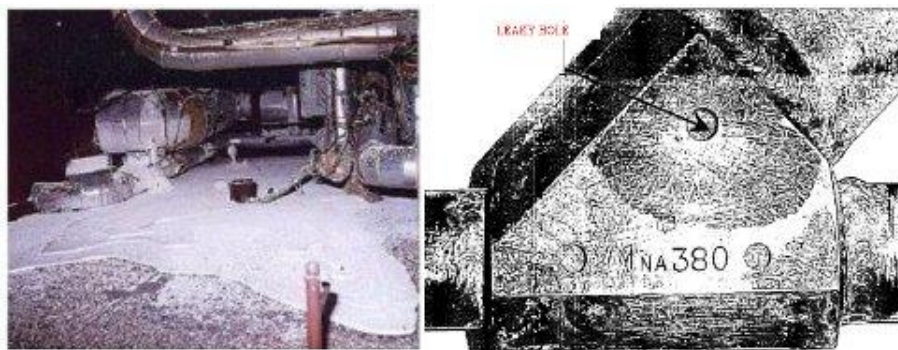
Sodium leak inside purification cabin due to hole in the valve body.
